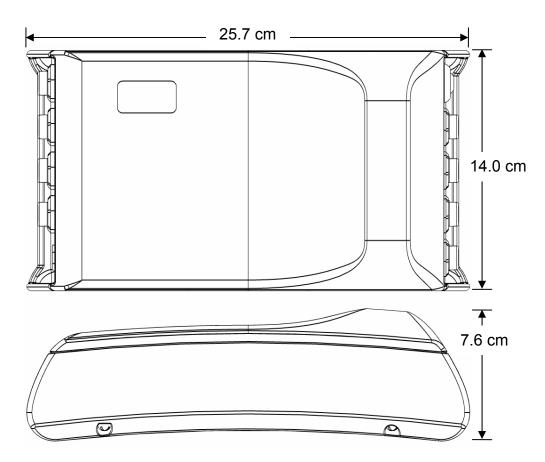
Dimensioned Embedded Computer Enclosure Drawing
